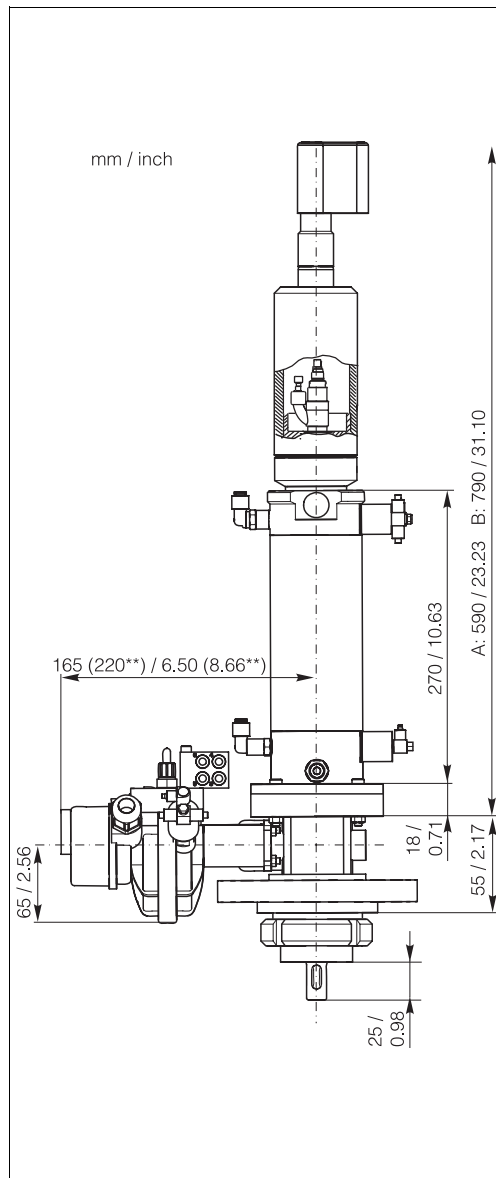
Assembly version: pneumatic, short, for KCl sensors, thread adapter nut
